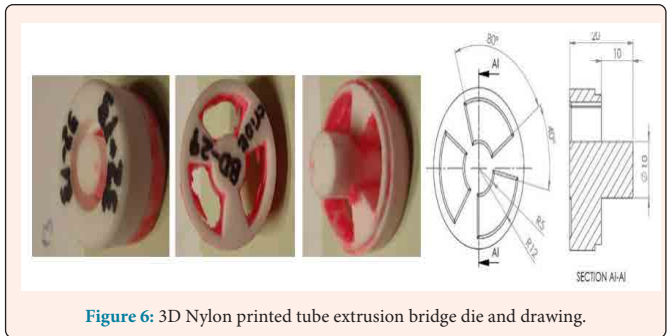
3D Nylon printed tube extrusion bridge die and drawing.
